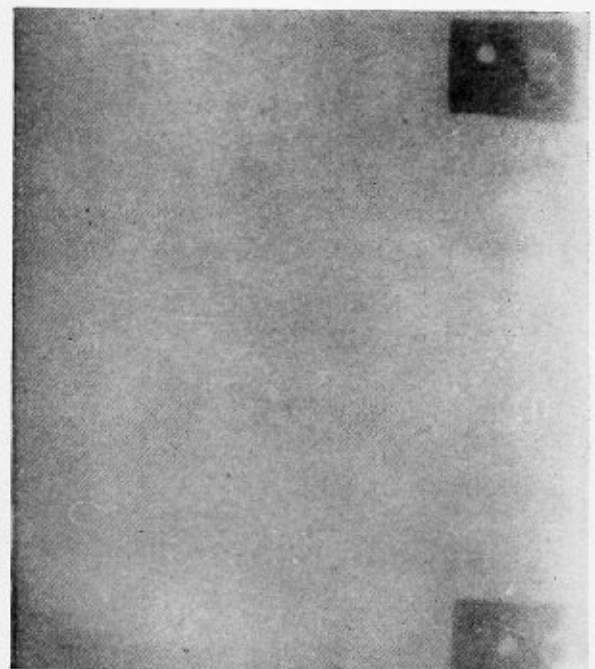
Exograph of sound weld in longitudinal seam
